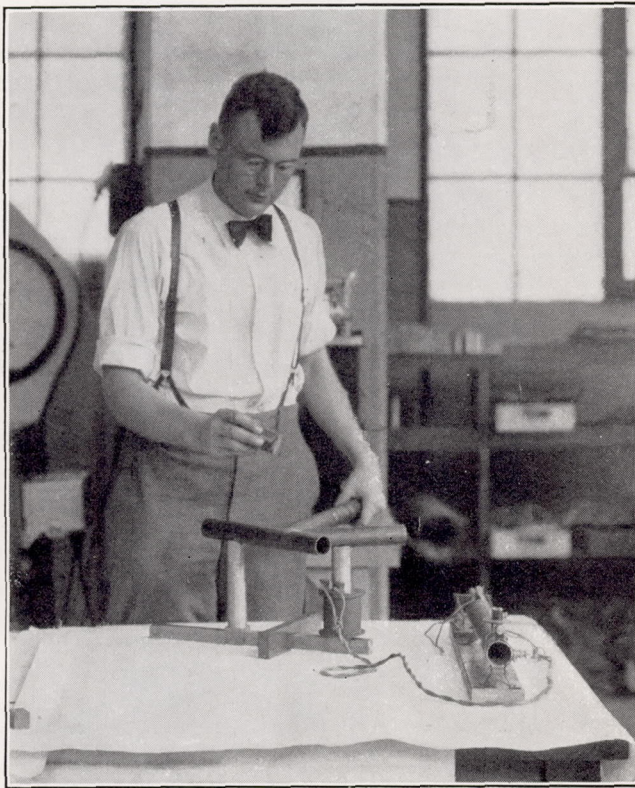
Examining a lattice joint for cracks by the magnetic powder inspection.
